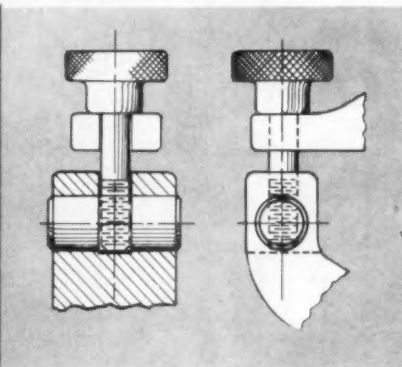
Sketch showing portion of swinging clamp in which a knurled head screw enters the pivot pin through an open slot.
